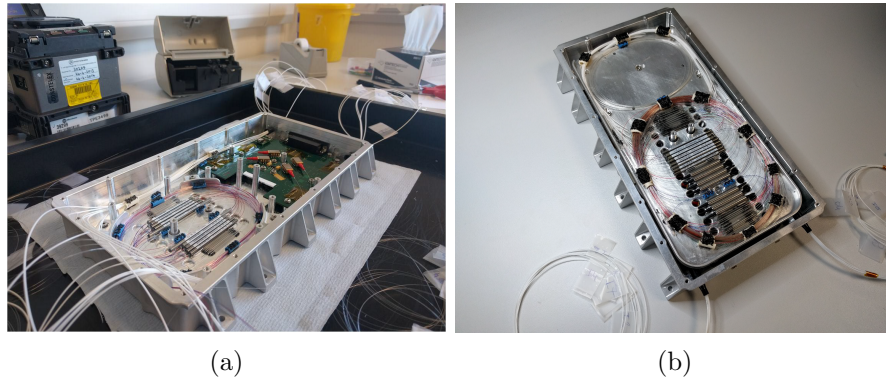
BEACON module assembly. (a) shows the fully completed PCBA and PSD. (b) shows an assembled and integrated FOAP.
